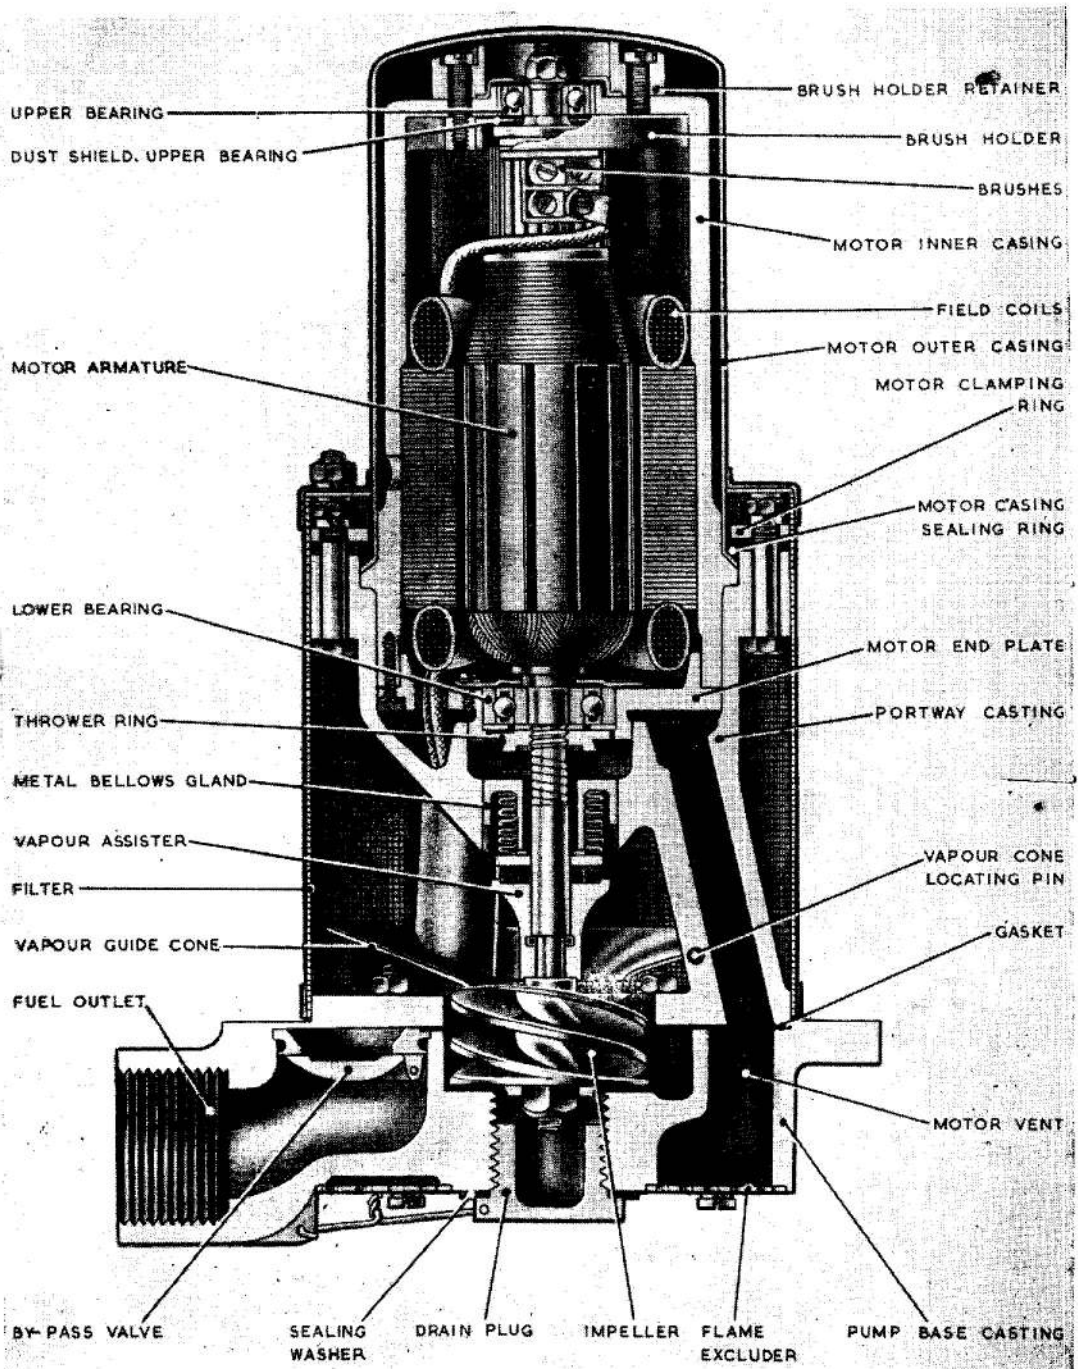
Sectional view SPE 403, Mk. I fuel pump
